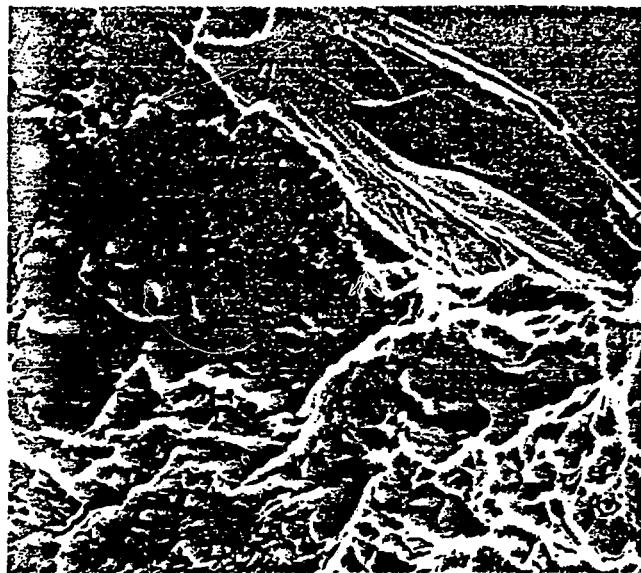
Fracture surface on a sample of TZM irradiated at 585°C and bend tested at 650°C. The tensile edge of the crack shows ductile dimple rupture, with a transition to cleavage fracture deep within the crack. 1000x.
